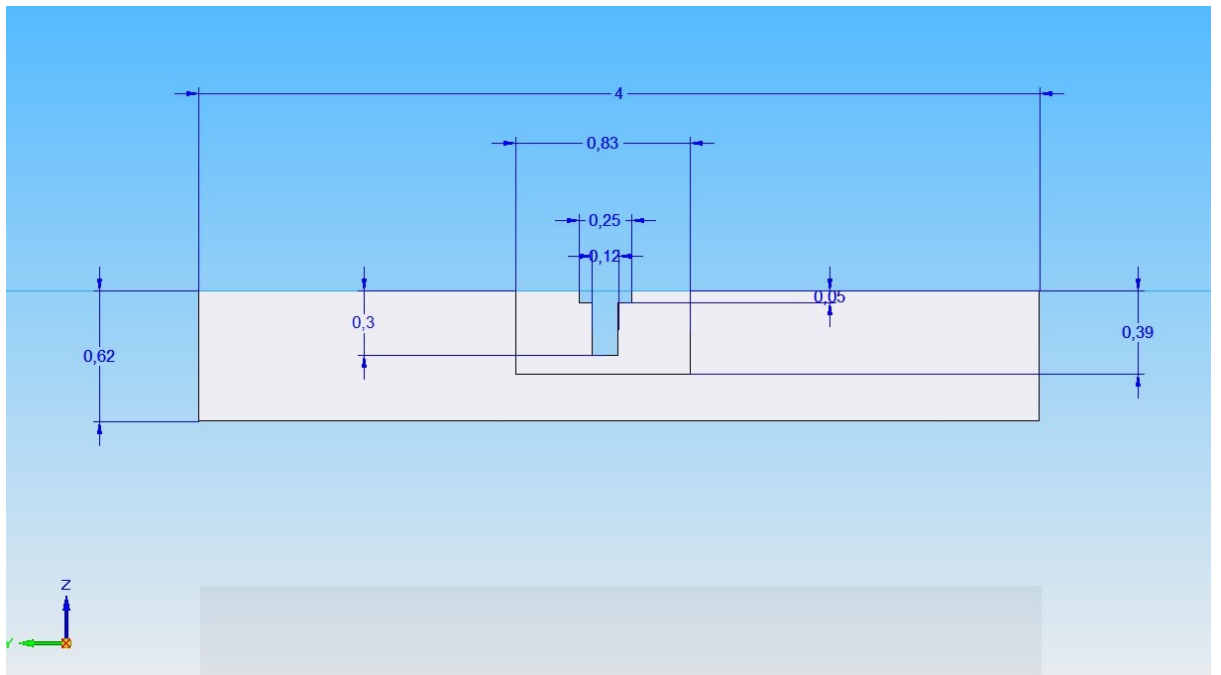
6 Front view of waveguide sensor carrier (Part 2)
